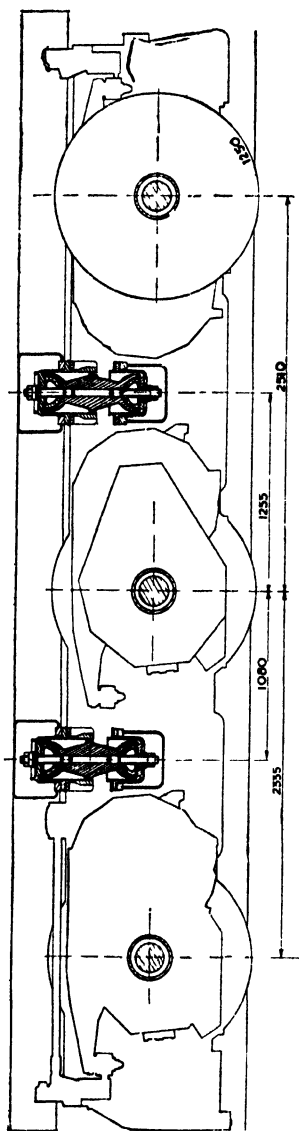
ARRANGEMENT OF SWINGING PIVOTS CONNECTING BOGIE BOLSTERS TO UNDERFRAME (ALSTHOM)
